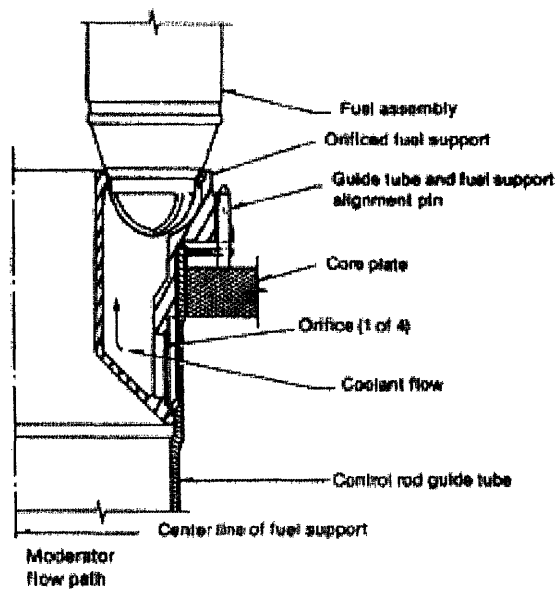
Bottom Fuel Support Pieces of a Typical BWR Assembly [23]
